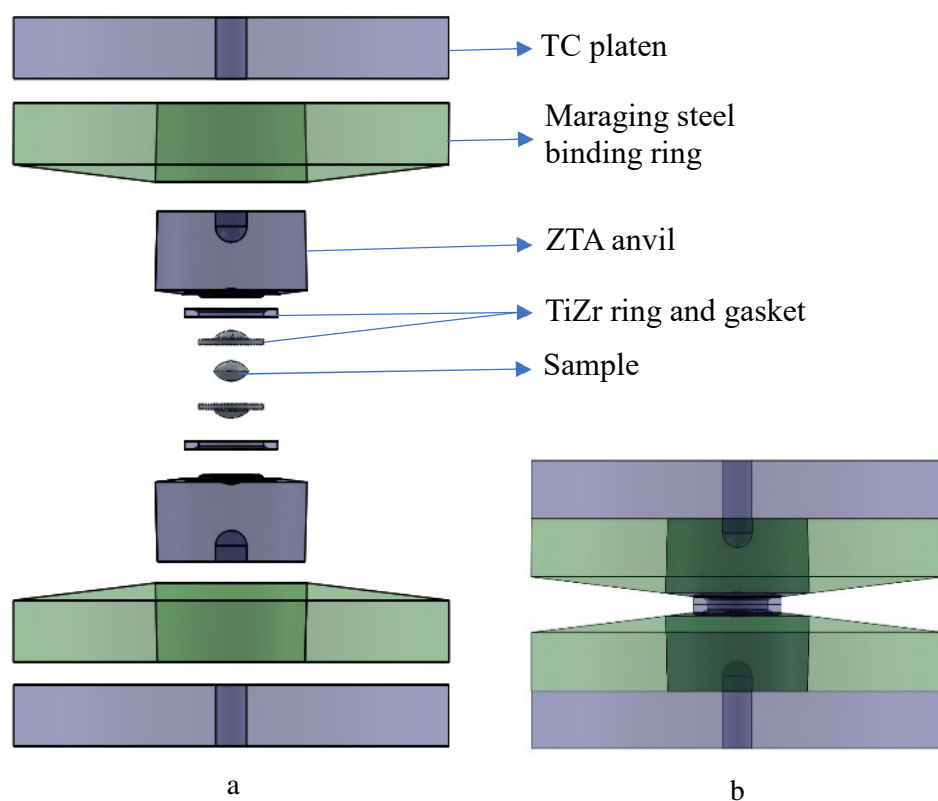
Exploded (a) and assembled (b) front view of ZTA anvil cell and components. Precise component dimensions were reproduced via SolidWorks® and SolidEdge® CAD software.
